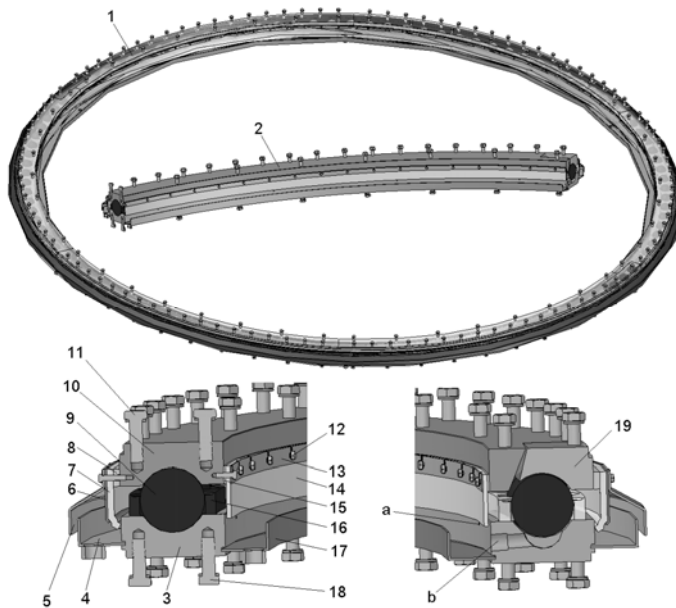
Longitudinal ball bearing with 8650 rolling diameter
